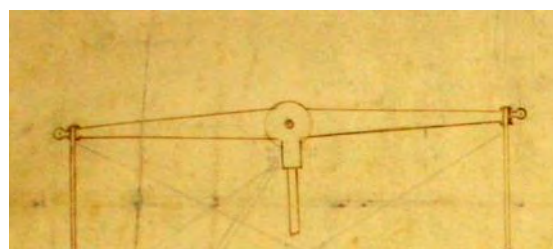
George Stephenson's sketch, showing cast iron crosshead. [Fig. 1.1 – detail.]
